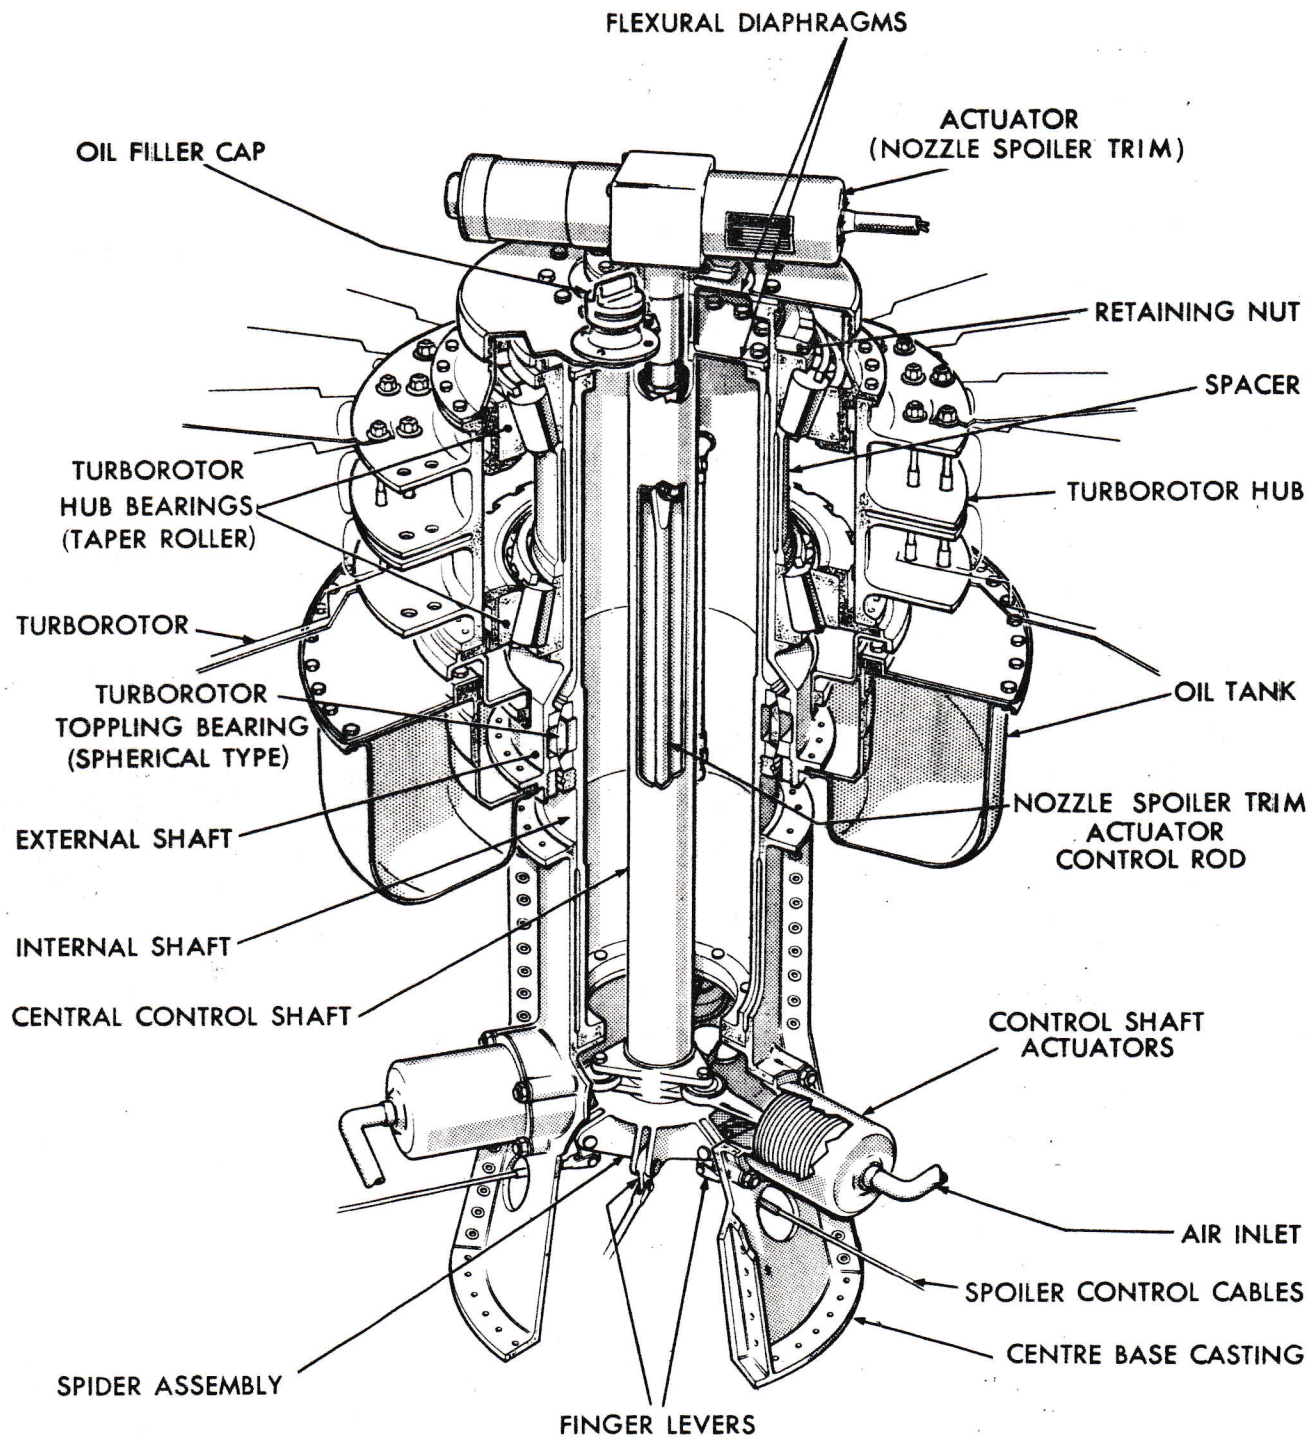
TURBOROTOR SHAFT ASSEMBLY
